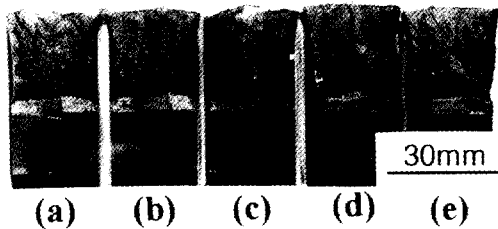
Macro-views of fractured specimens; (a) F.L., (b) F.L.+1 mm, (c) F.L.+3 mm, (d) F.L.+5 mm, and (e) F.L.+7 mm.
